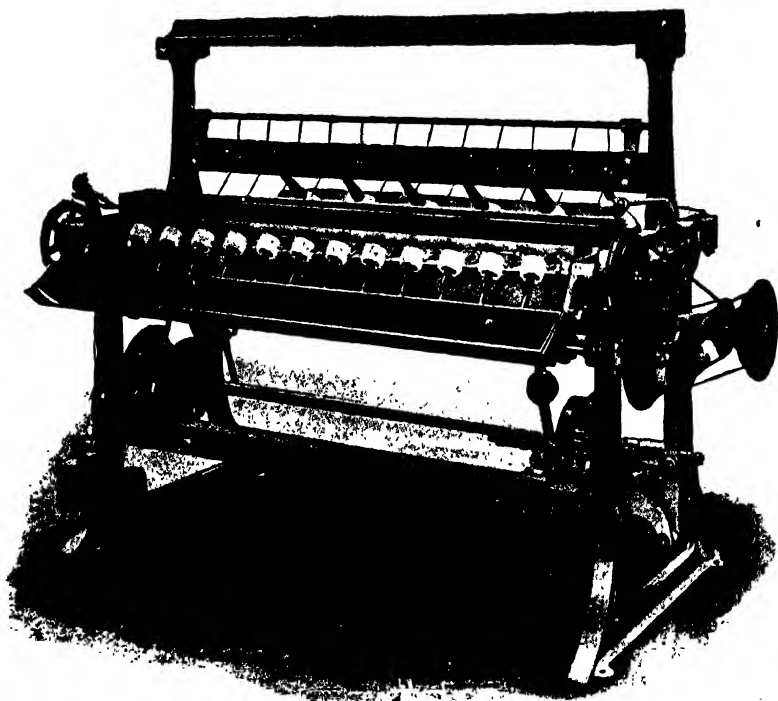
12-spindle baller for shoe and saddlers' hems.
